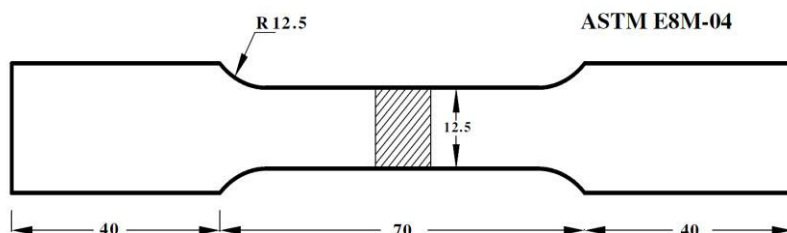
Dimensions of the tensile test specimen (Elangovan *et al.* 2009).
